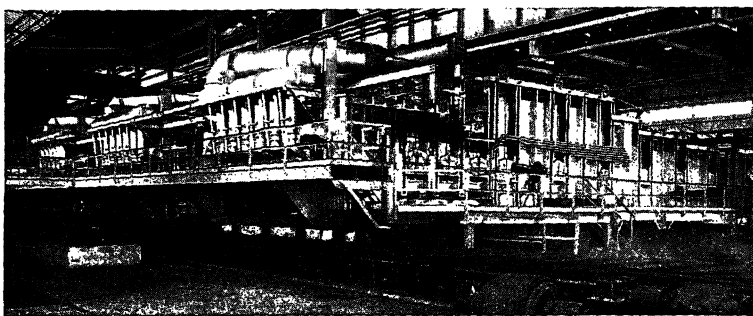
Slab-heating furnaces on a recent continuous strip mill.
